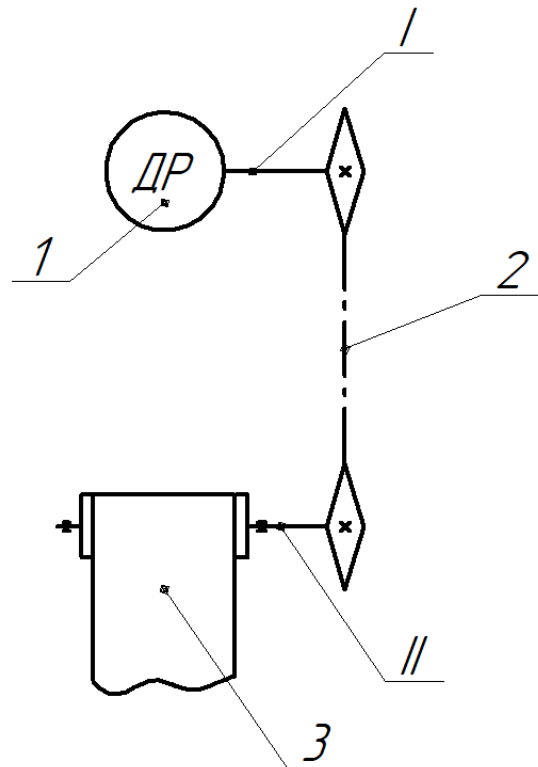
Kinematic scheme of the belt conveyor drive: 1 – gear motor, 2 – chain transmission, 3 – rubberized belt;
